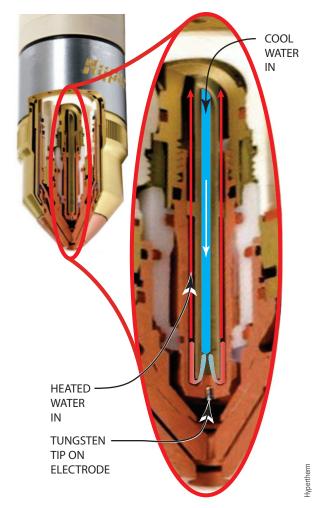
Large amperage plasma torches have cooling water circulating through internal passages to cool the electrode so it will last longer.
